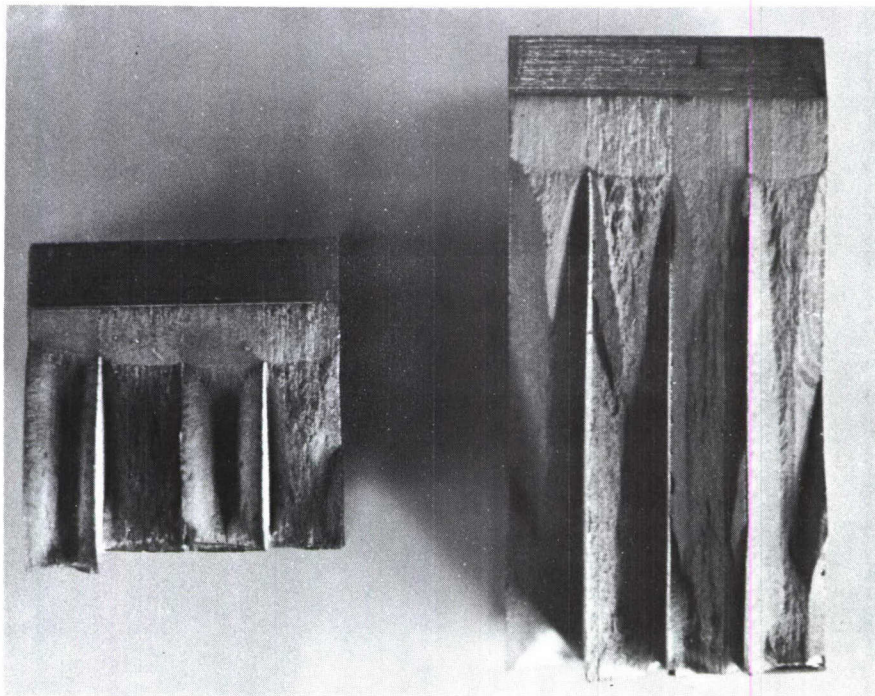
Larger three-point bend specimen used in the fracture studies.
